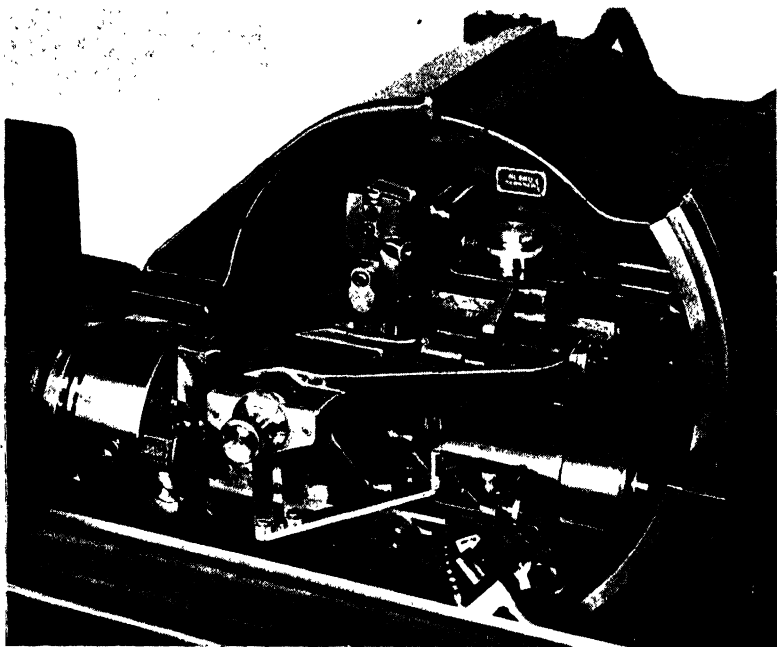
EX-CELL-O PANTOGRAPH-TYPE INTERNAL GRINDING-WHEEL DRESSER
